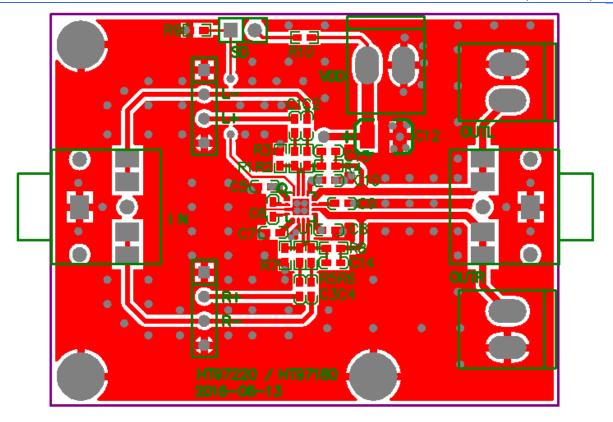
Top View of HT97180(L) Demo Board PCB Layout
